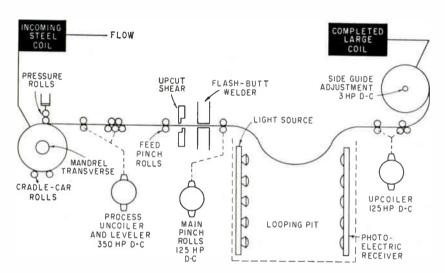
On this steel strip-welding and coiling line, the photoelectric receiver controls the field strength of the up-coiler motor and thus regulates loop depth
